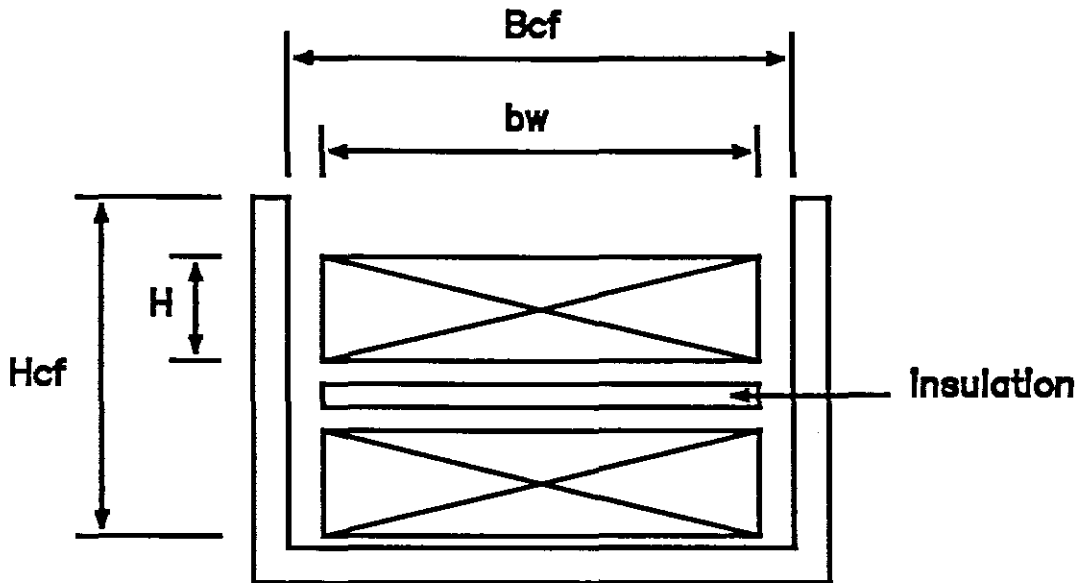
Symbols of coil former and winding dimensions as used in power transformer design (adapted from [11]).
